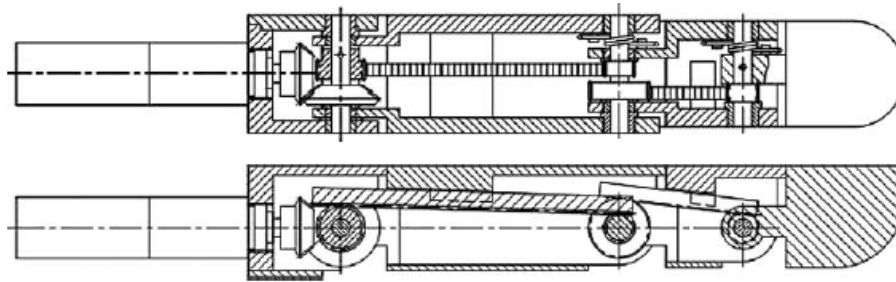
Bevel gear, rack & pinion underactuated finger by Zhang, et al. (2009).
